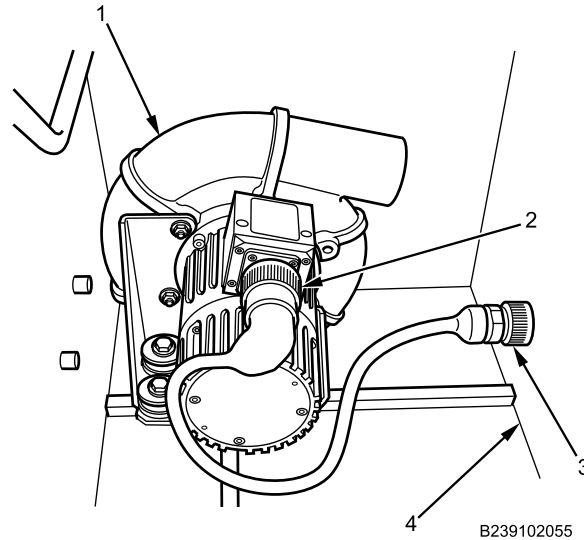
HVAC/LSS Main Blower Motor Wiring Harness.
